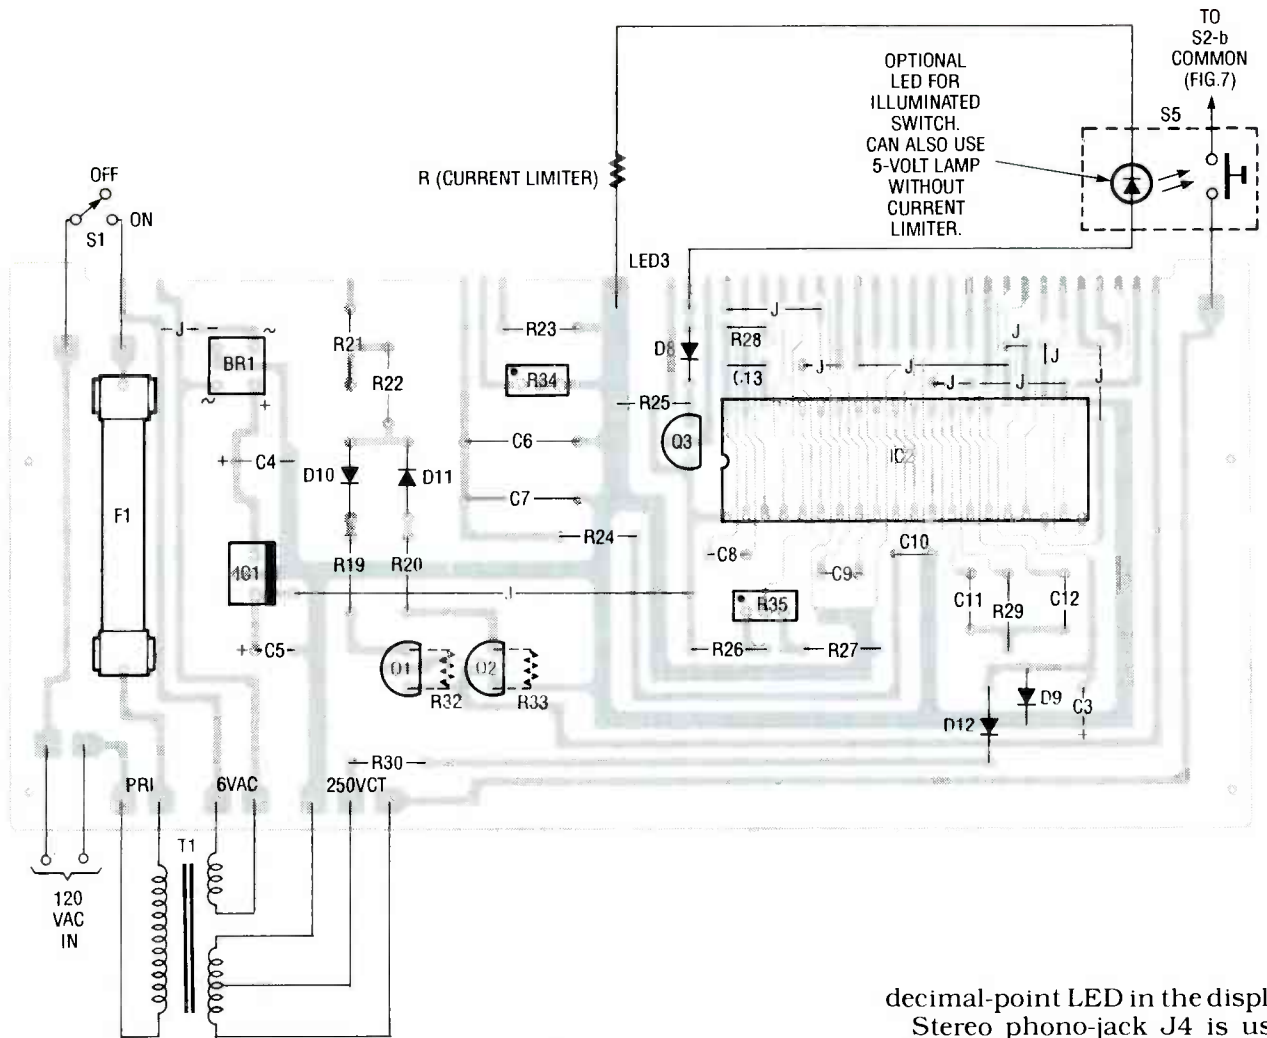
ALL COMPONENTS ON THE MAIN BOARD are mounted on the component side except for R32 and R33 which must be tack-soldered to the solder side of the board.
